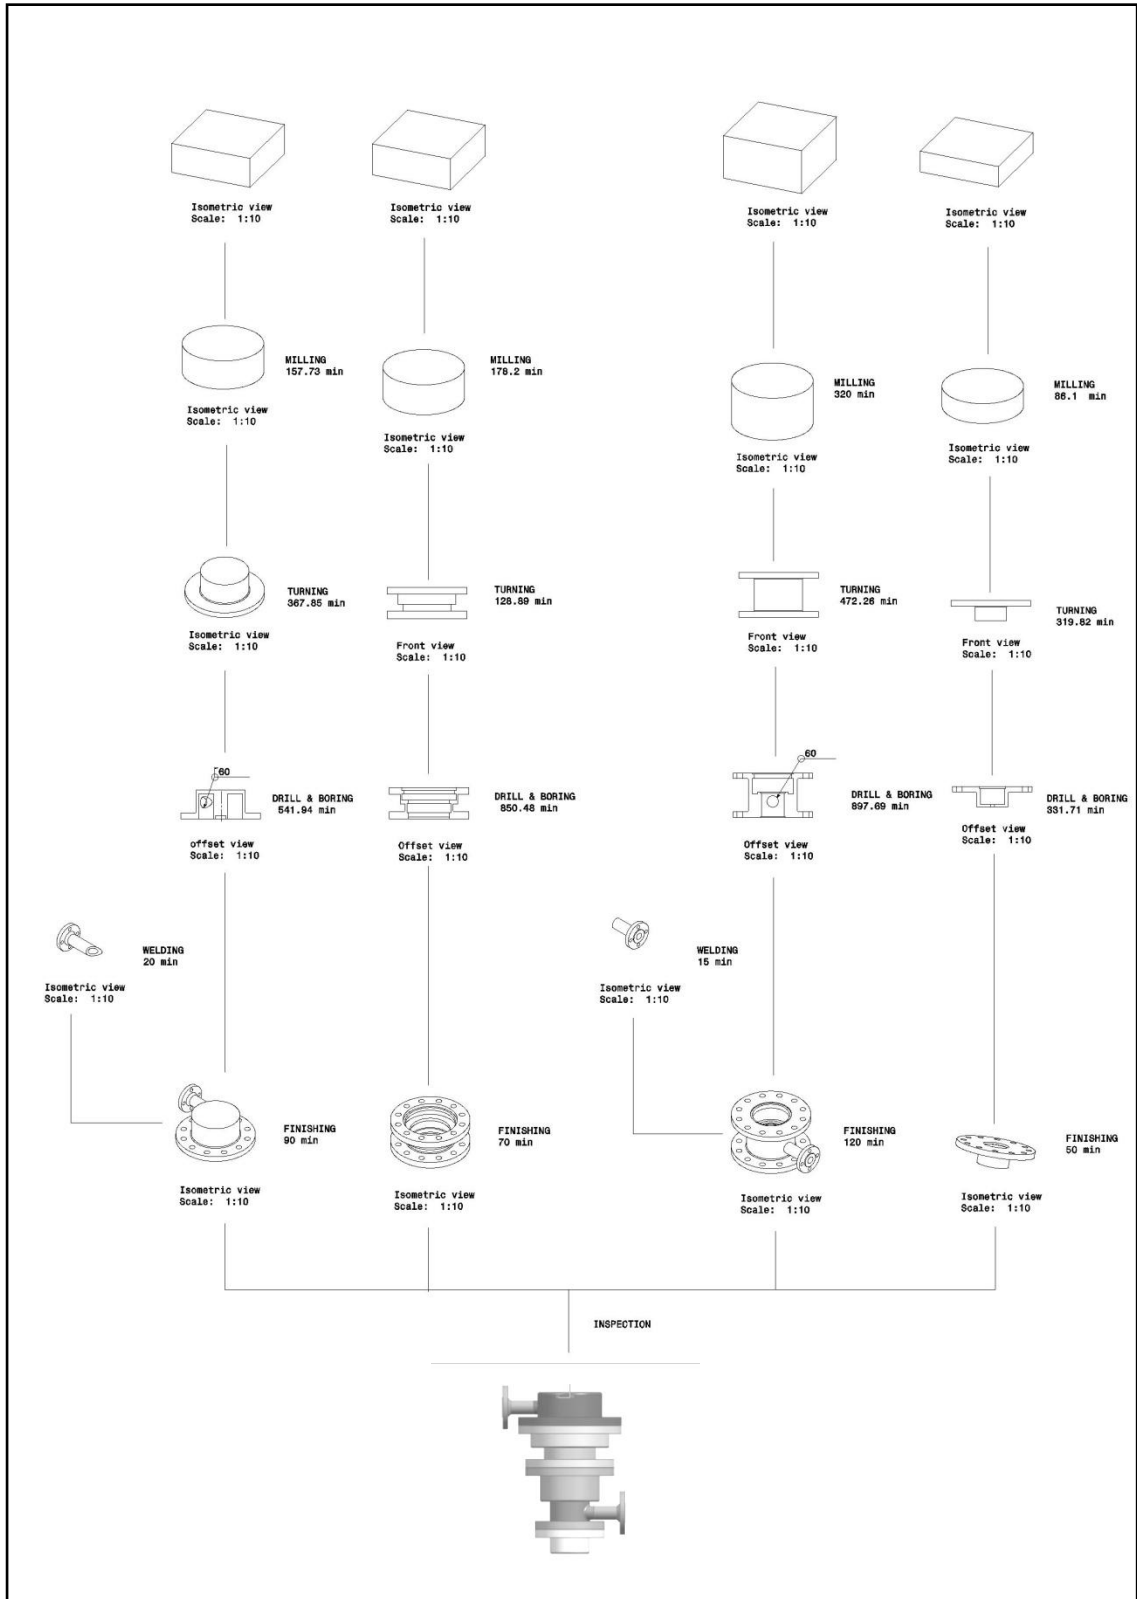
Overall Sequence of Fabrication Process of Swirler by Machining.
